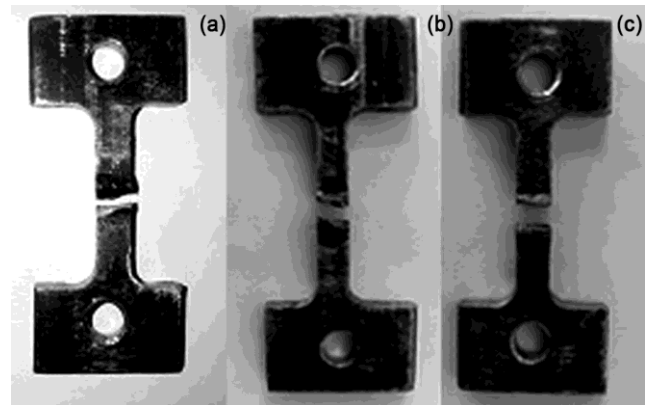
Macroscopic view of tensile tested sample (a) Laser remelted MIG welded joint (400 W), (b) Laser remelted MIG welded joint (600 W) and (c) MIG welded joint.
